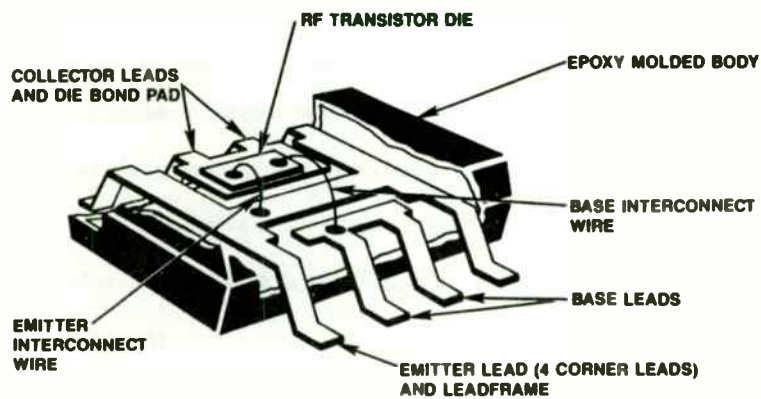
CUTAWAY VIEW OF THE SORF TRANSISTOR
